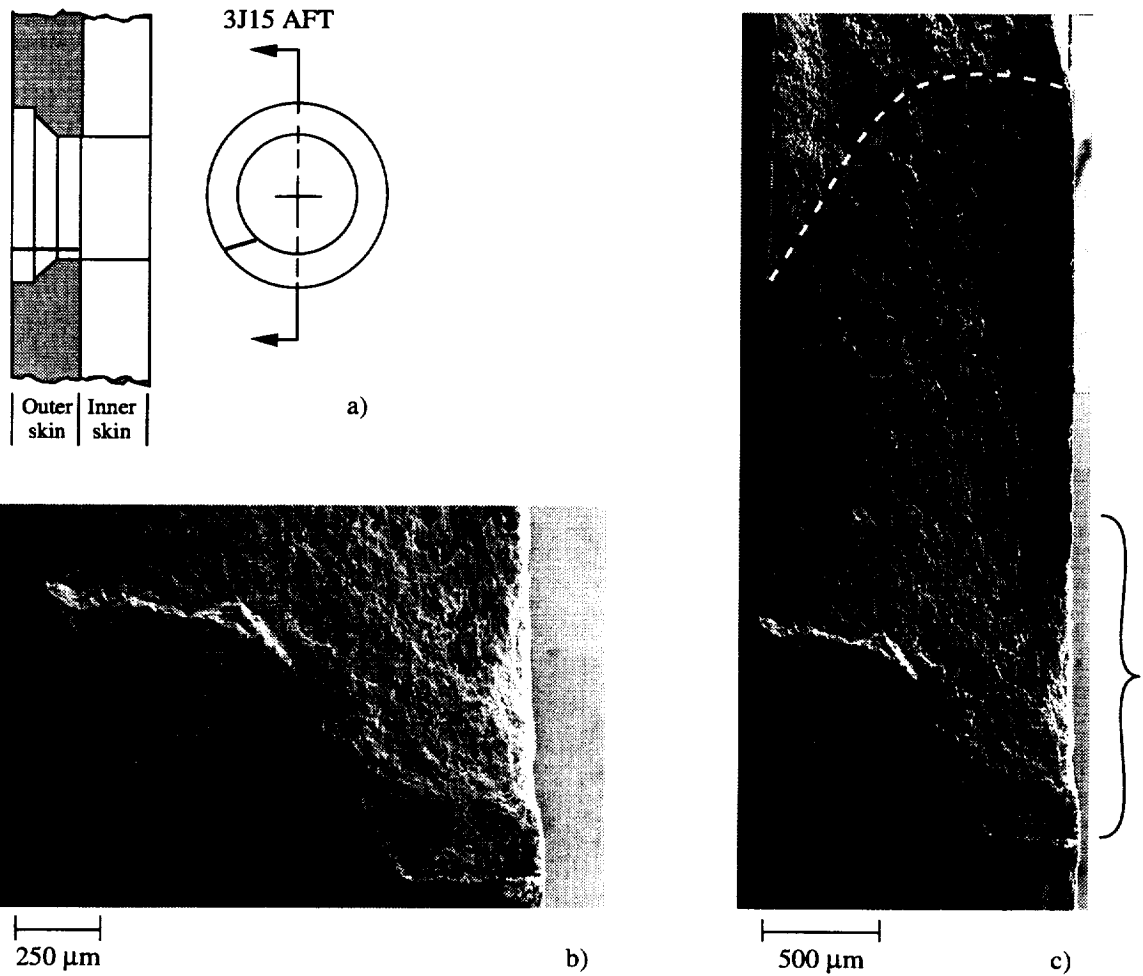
a) The schematic shows the rivet hole 3J15 configuration and the location of the outer skin fatigue crack oriented in the aft direction and about the 8 o'clock position. b) The SEM micrograph shows the fatigue crack region, marked by the bracket in Figure 9.32.c, at high magnification. c) The SEM micrograph shows the fatigue crack at the rivet hole (bottom). The bracket locates the region of crack initiation along the faying surface and the dashed line marks the fatigue crack front.
